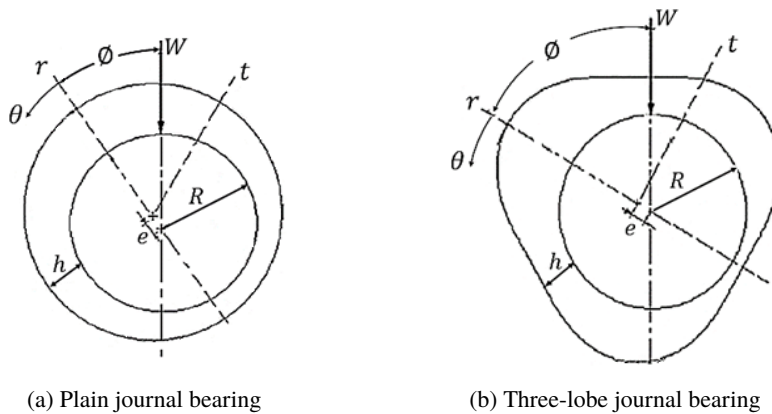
Geometry of cylindrical and three lobe journal bearings [9]
